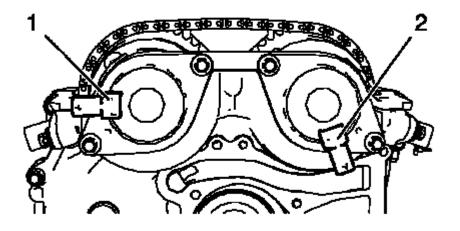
Camshaft Position Actuator Solenoid Valve Bolts Courtesy of GENERAL MOTORS COMPANY
